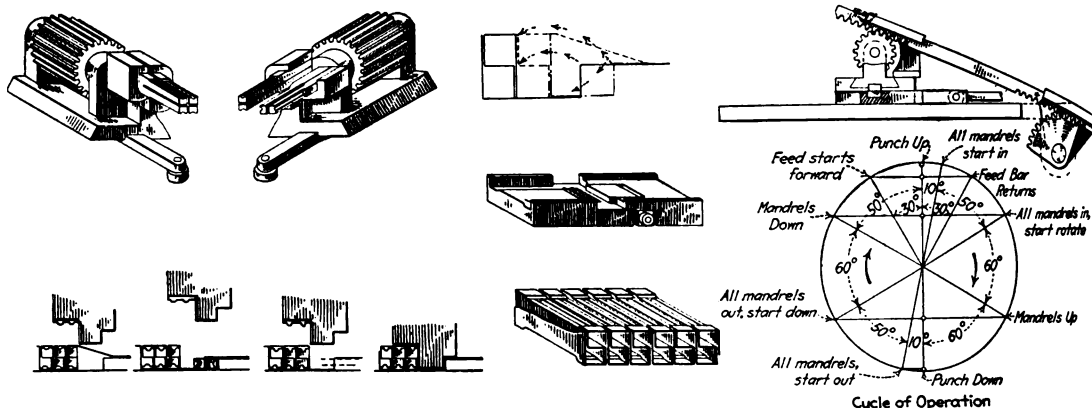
DETAILS OF PUNCH AND MANDREL BENDING MOVEMENTS
